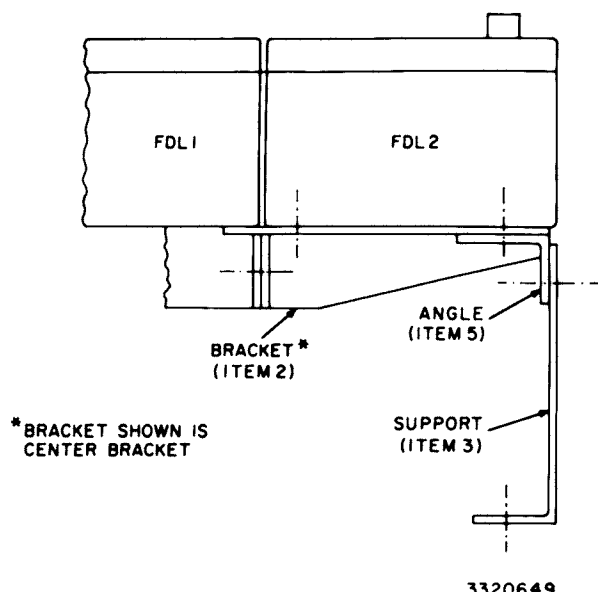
Center Bracket and Support Assembly Utilized in Mounting Color Fixed Delay Line in TR-22 Machines
